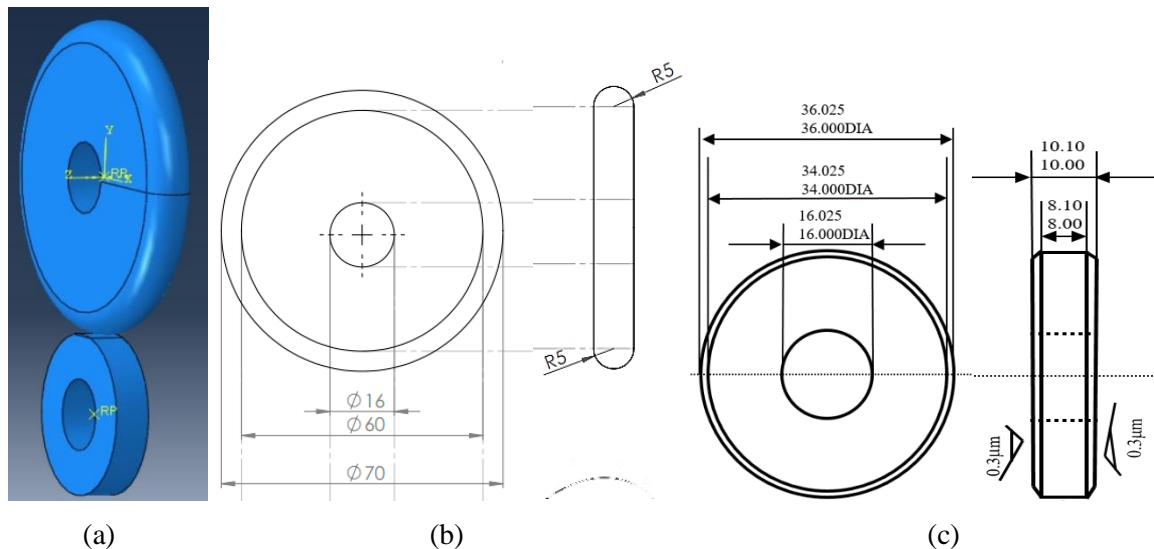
(a) The configuration of the wheel samples for Amsler wear test, (b) the dimensions of the top WC wheel, and (c) the dimensions of the bottom steel wheel
